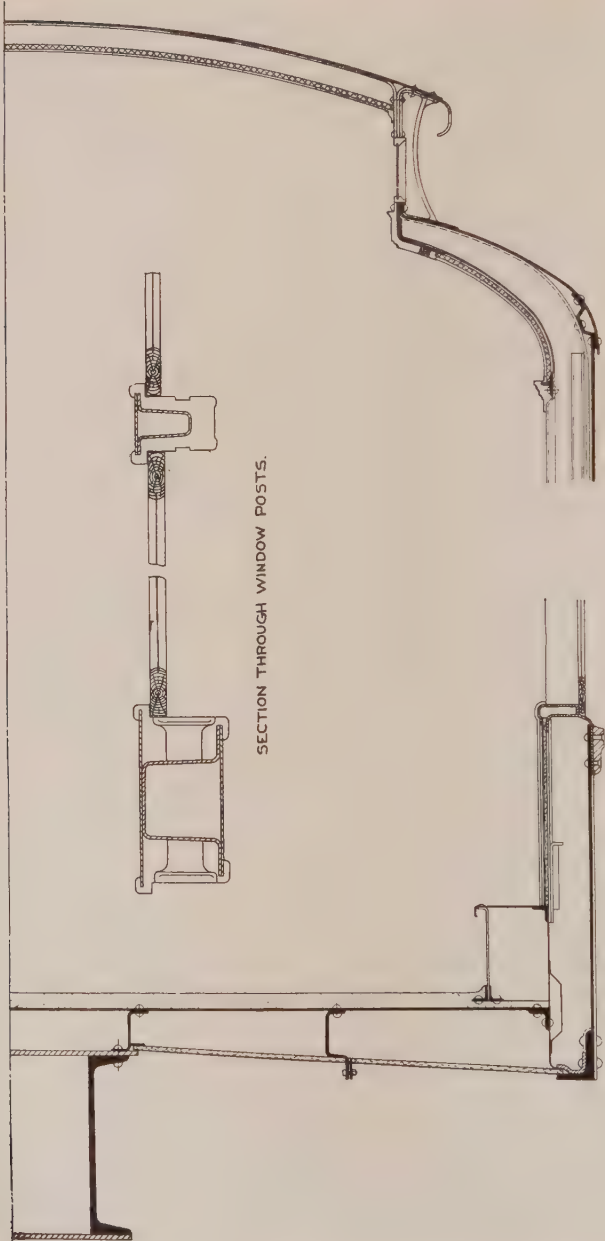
Cross Section of Pennsylvania Steel Passenger Car.
